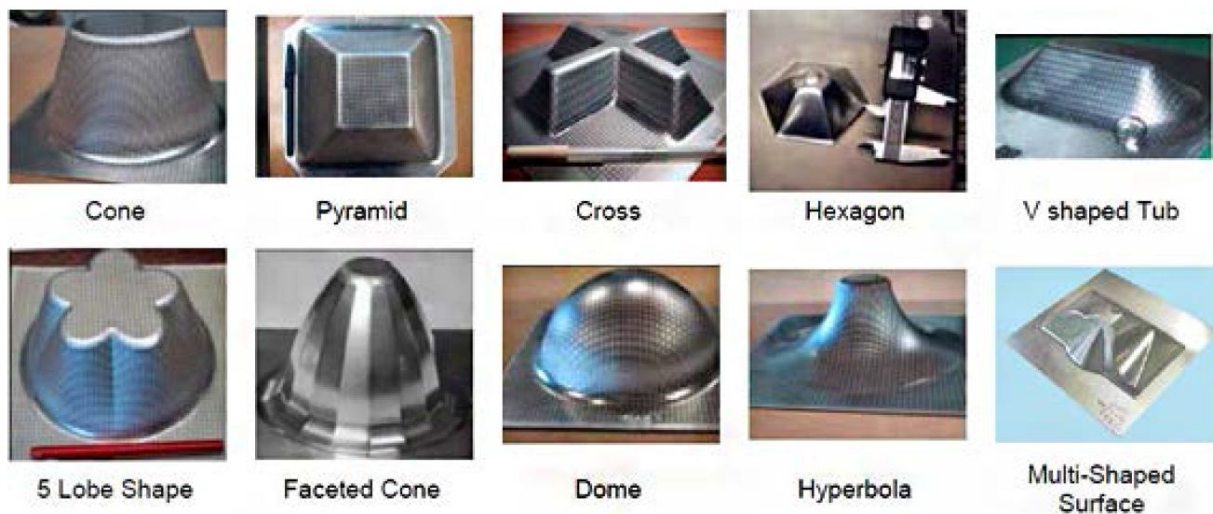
Panoply of parts obtained by SPIF Manufacturing [22].
